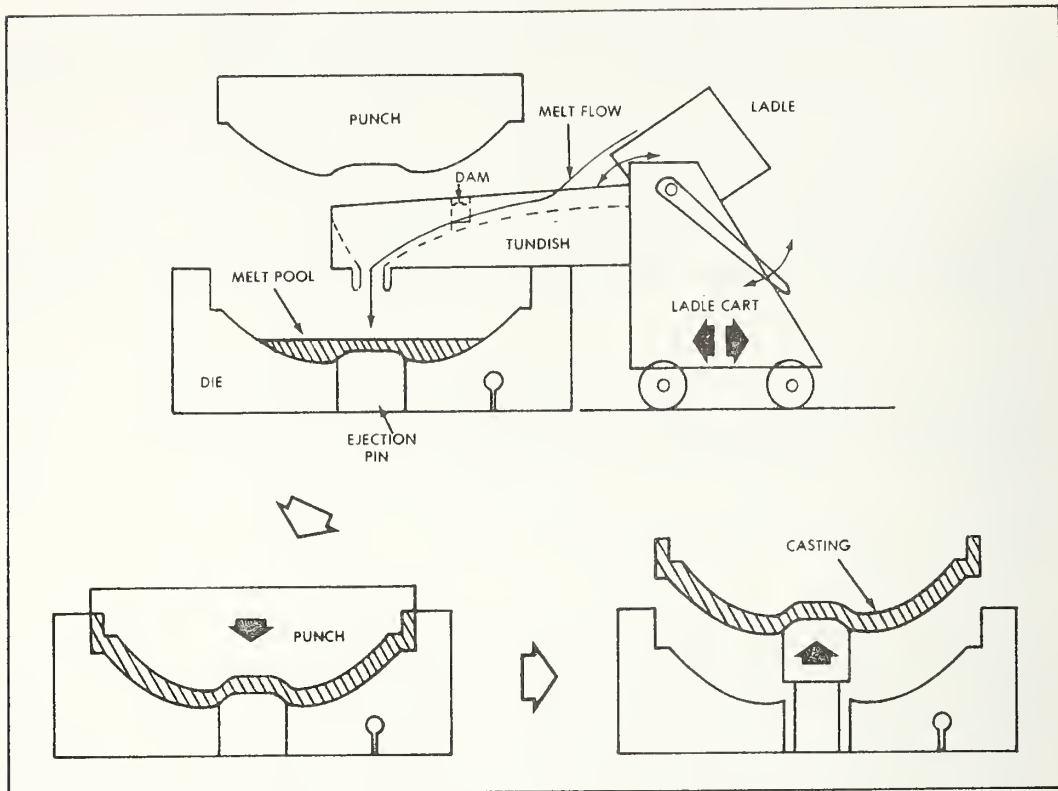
SQUEEZE CASTING PRODUCTION METHOD
